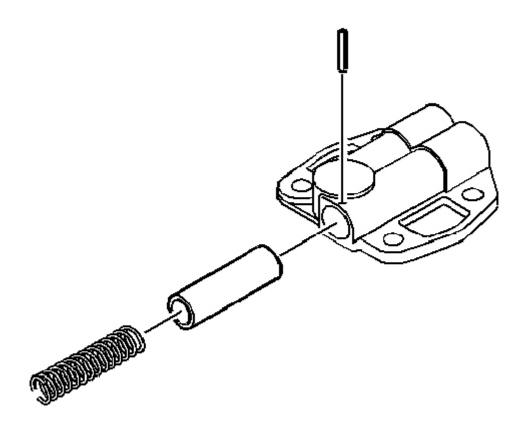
View Of Oil Pump Pressure Relief Valve, Spring & Spring Straight Pin Courtesy of GENERAL MOTORS CORP.
